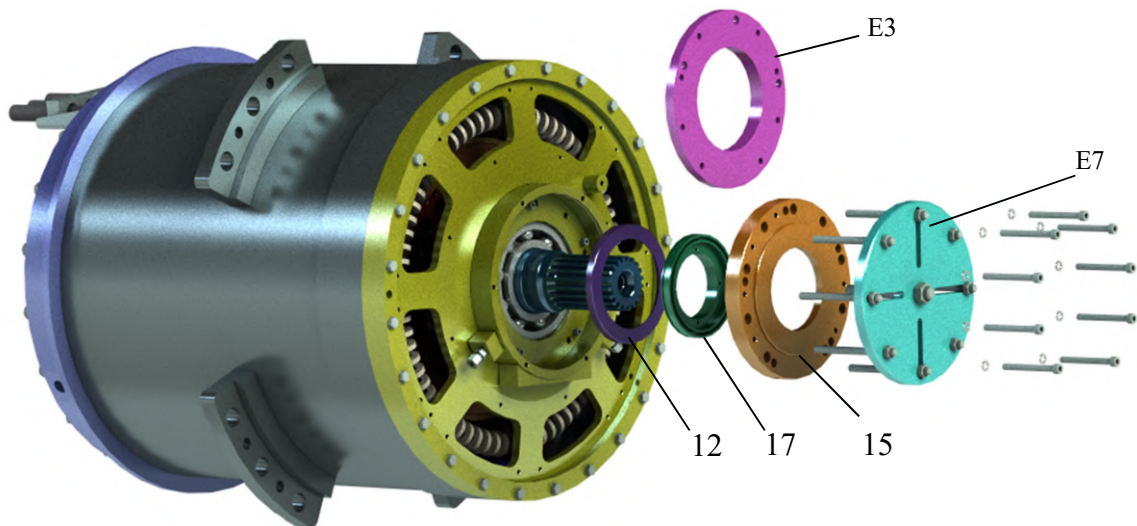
Dismantling of Female Labyrinth Seal, Oil Slinger and Thrust Ring on Drive Side
